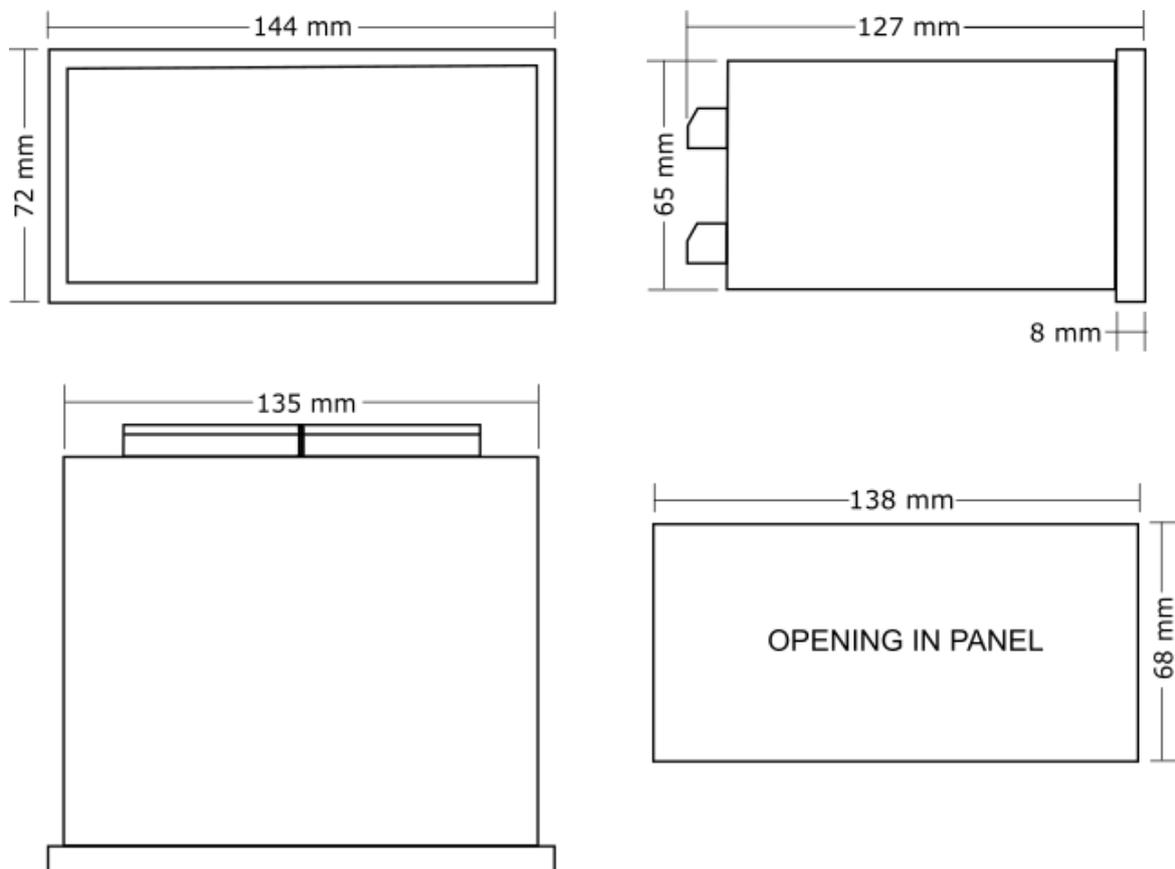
Housing dimensions of DL2 device and cut-out dimensions of an assembly panel.
